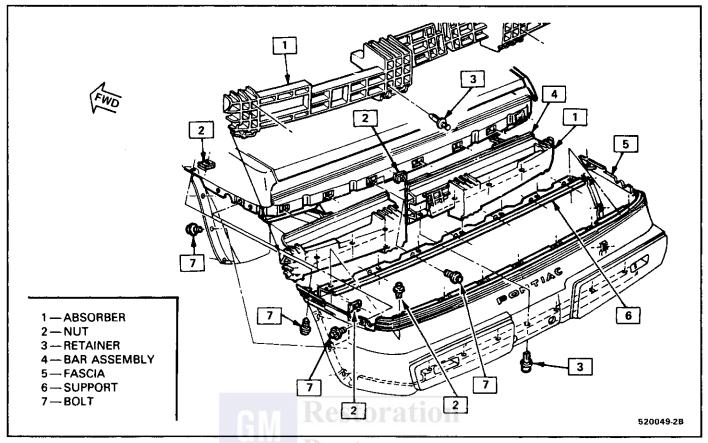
Rear Fascia/Bumper/Impact Bar Asm. to Body (Non GT)
